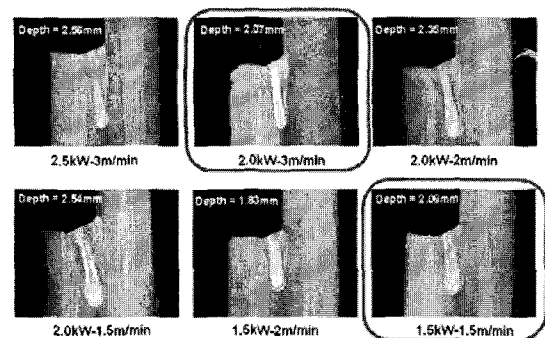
Penetration depth for various conditions of laser power and welding speed.
